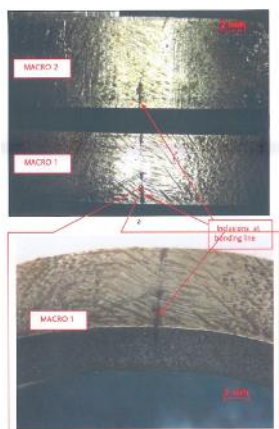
Inclusion at pipe weld seam on vintage NPS 2 gas main
